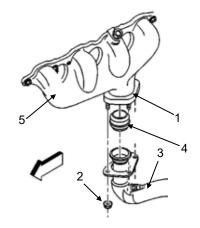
Y-Pipe Assembly (3), Y-Pipe Gasket (4), Exhaust Manifold Heat Shield (5), Exhaust Manifold (1), and Nut (2)
